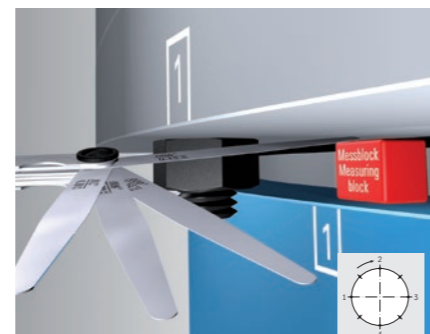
Basic setup for measuring the axial reduction with a feeler gauge
